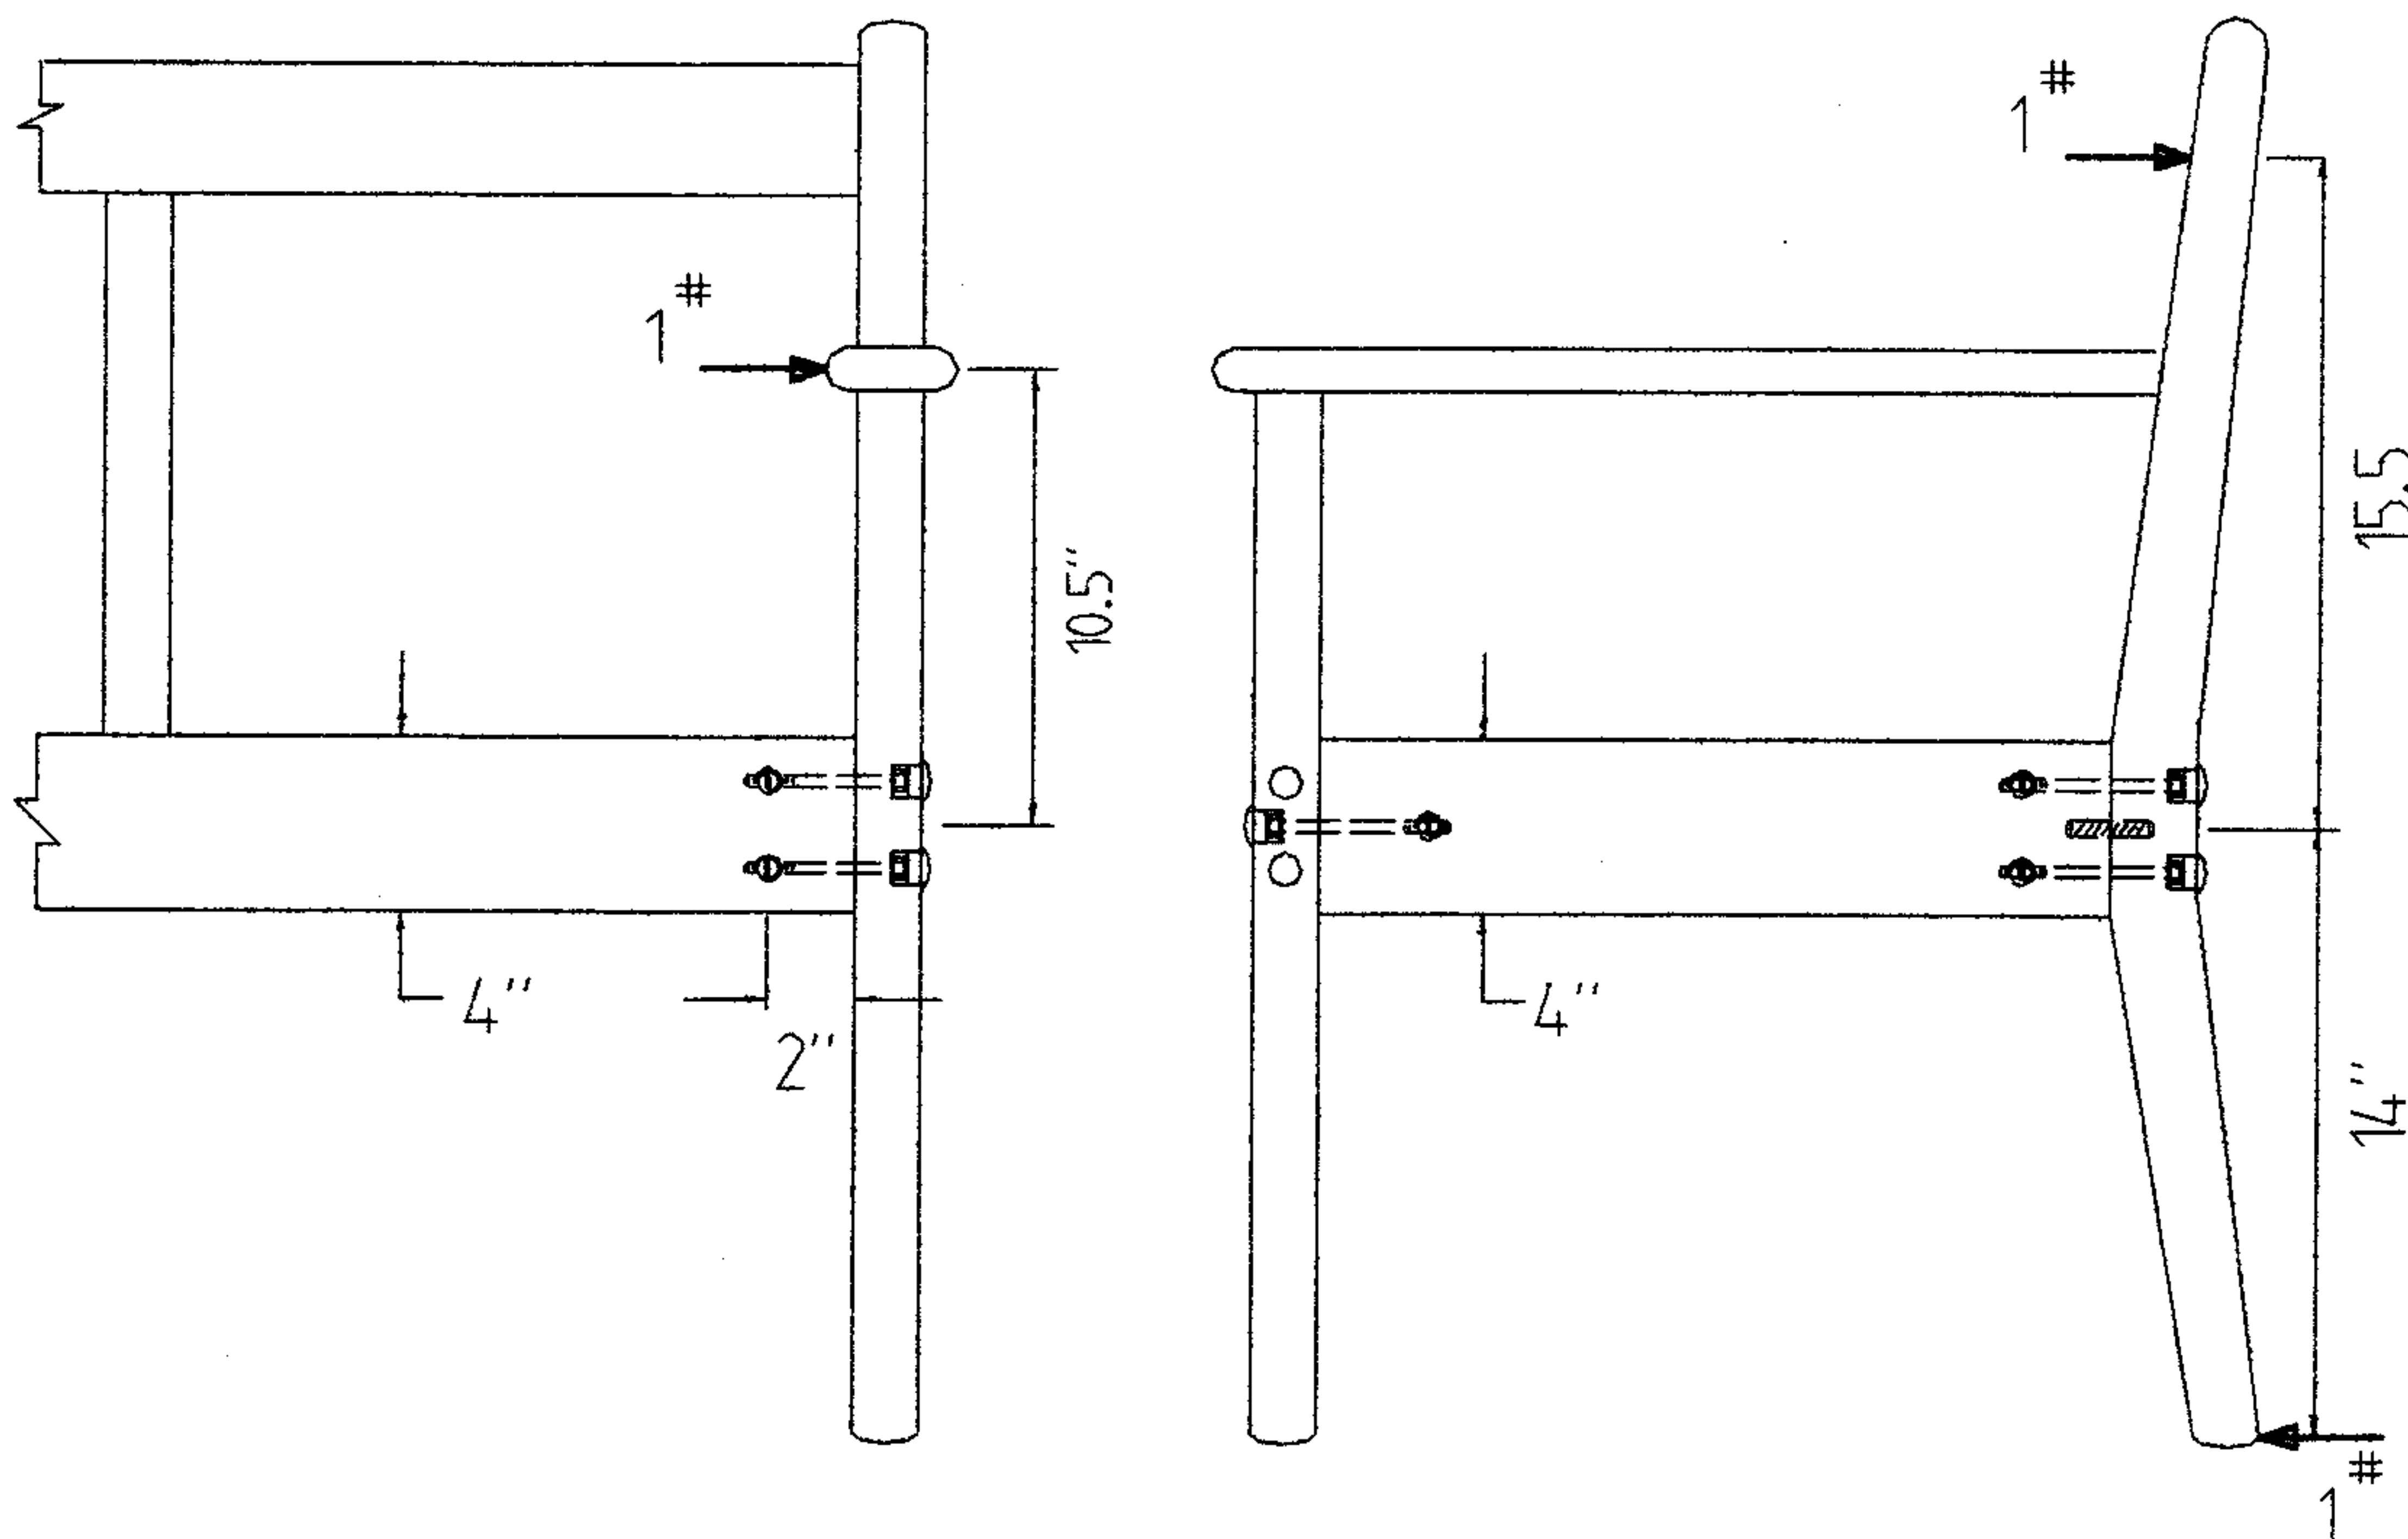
Diagram illustrating the use of through bolt with dowel nut construction in a front post to front rail joint (left) and a side rail to back post joint (right)
